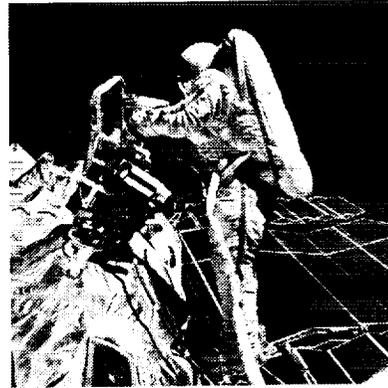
Soviet Union Cosmonaut Successfully Performing Welding in Space on Soyuz T12
